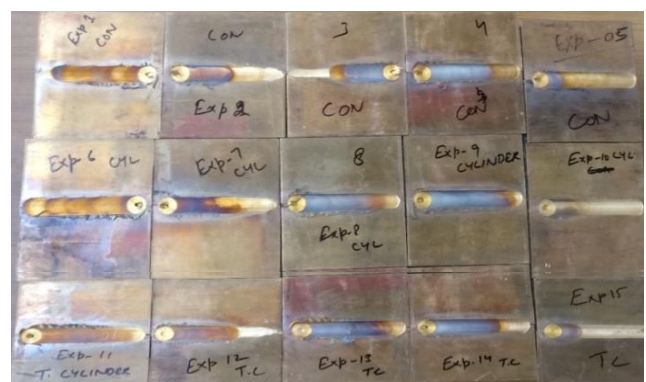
Friction stir Welded Joints of Cu-Zn30 Brass
